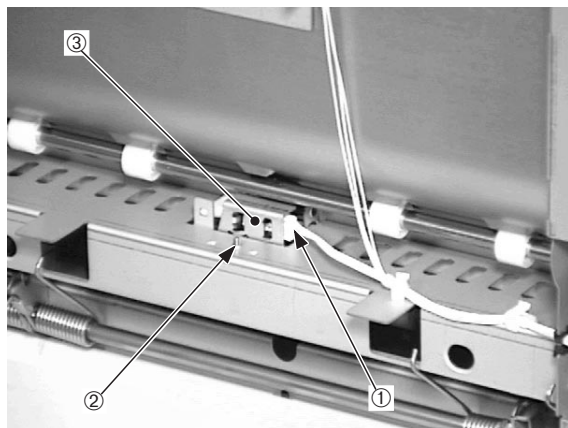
C. Upper cassette sensor / Lower cassette sensor / Upper cassette paper-level sensor 1, 2 / Lower cassette paper-level sensor 1, 2 / Upper cassette paper-out sensor / Lower cassette paper-out sensor
